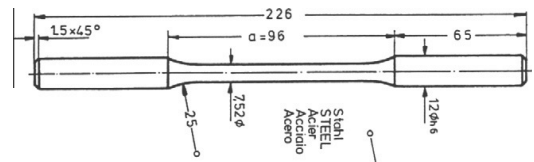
The geometry of the fatigue test bar. All dimensions are in millimeters.
